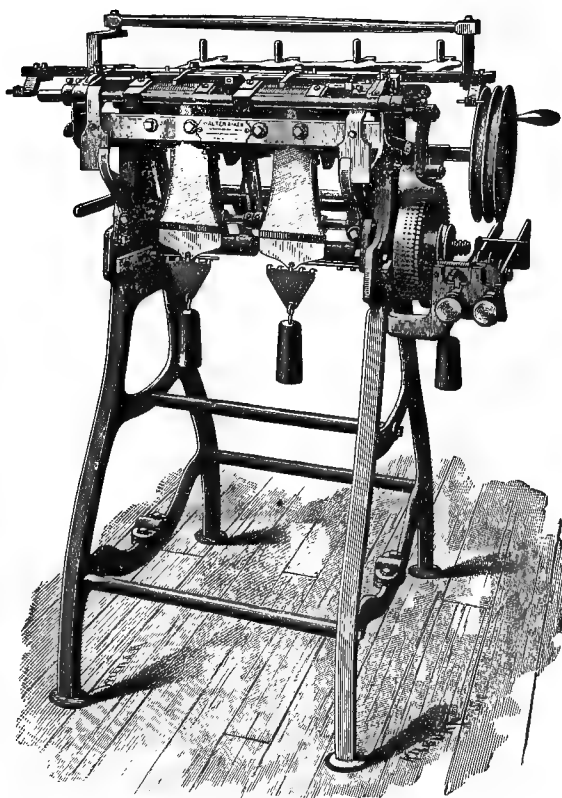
“Saxony Machine.” (Full fashioning.) (The Abel Machine Company.)
